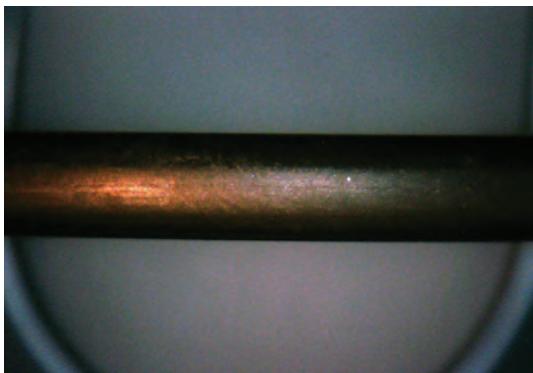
shows the outer circumference of one of the caliper piston O-rings viewed through a microscope while being side-lit.
